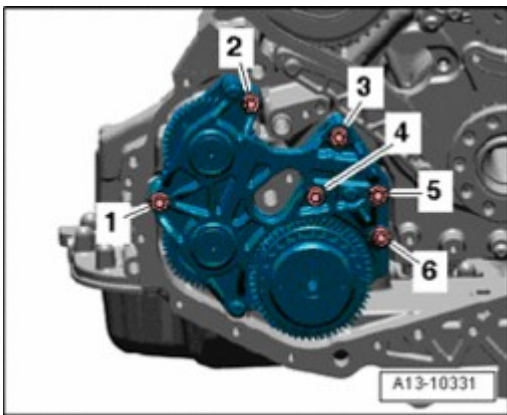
Positioning Spur Gear Unit And Tighten Bolts In Diagonal Sequence
